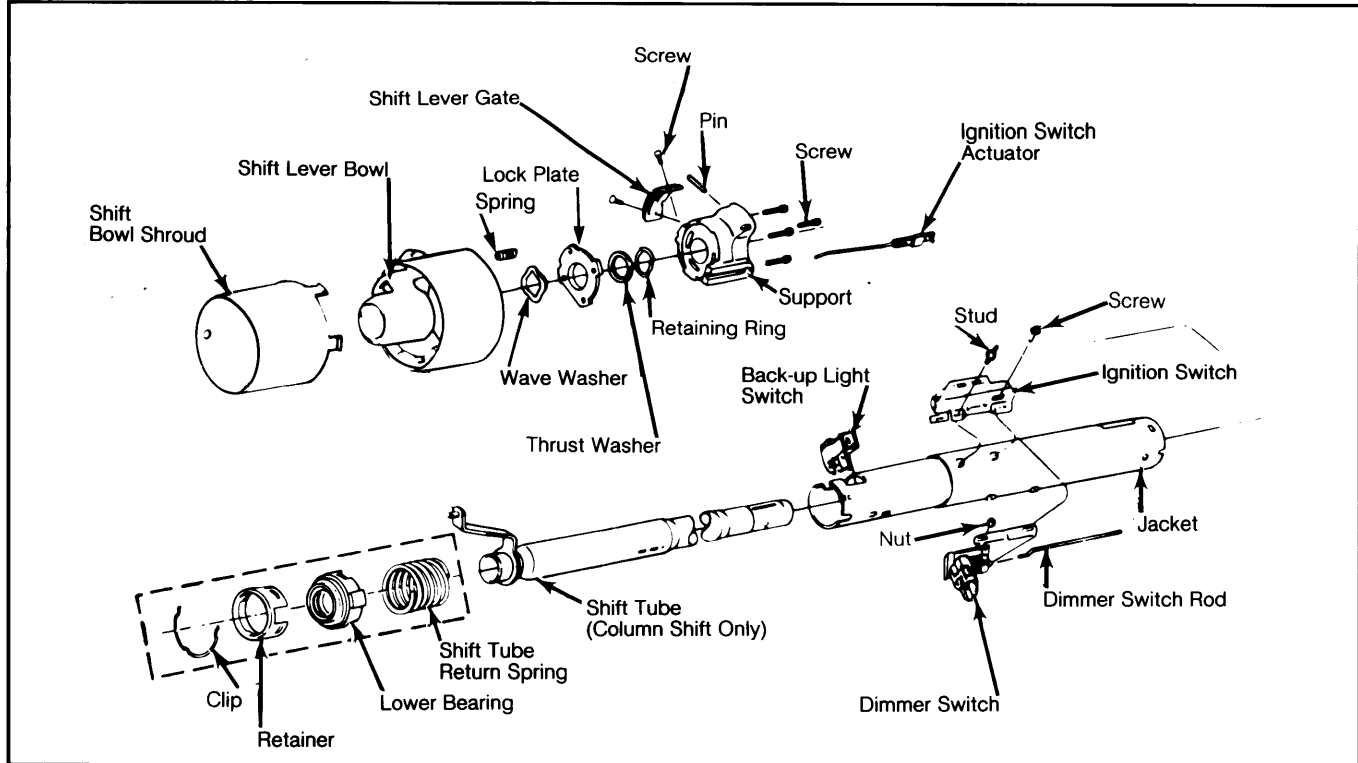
Exploded View of "S" Model Tilt Steering Column Housing
